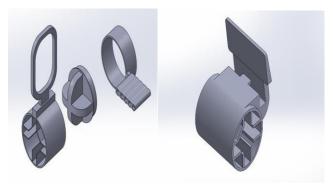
(a) Previous design of film holder, and (b) New design of film holder.
